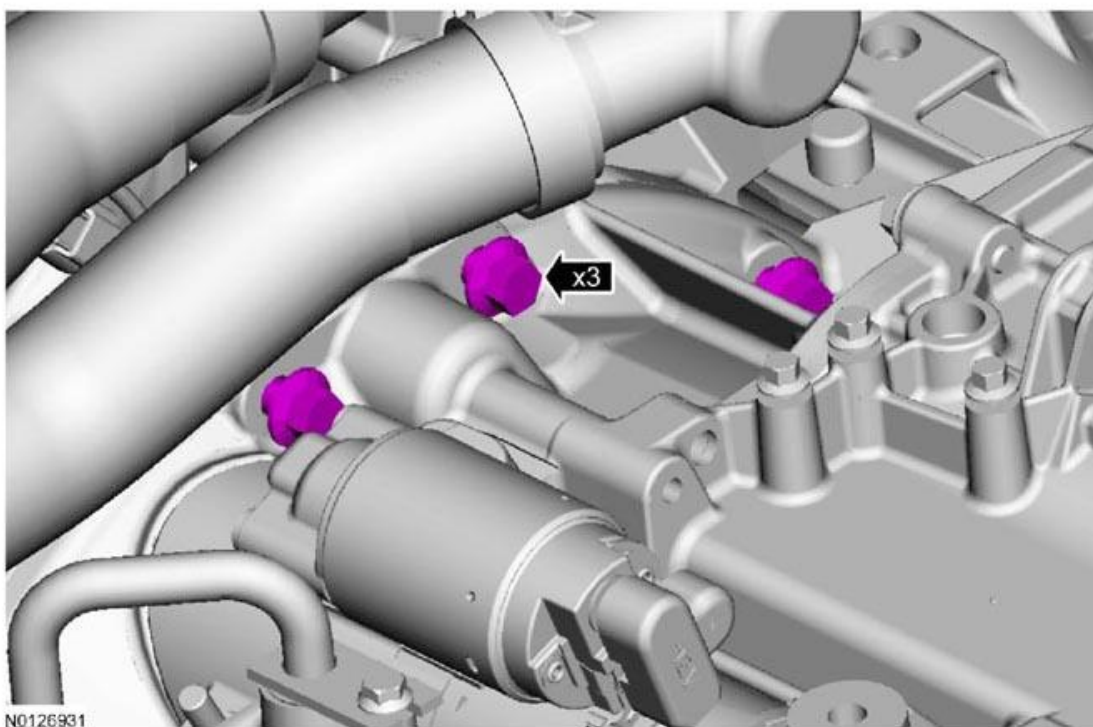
Locating Exhaust Manifold Heat Shield Bolts
